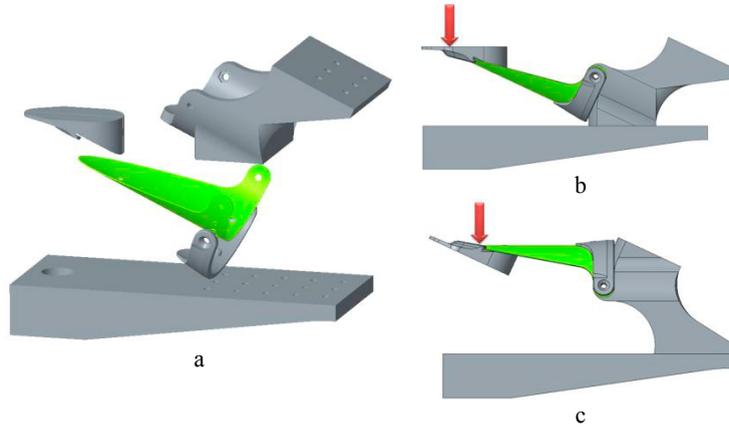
(a) exploded view to the test set-up components; (b) set-up mounted to test with downward force; (c) set-up mounted to test with upward force.
